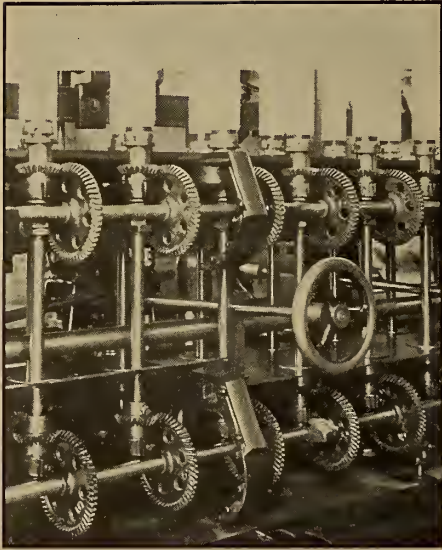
BOBBIN AND SPINDLE SHAFTS OF SPEED FRAME, SHOWING SKEW BEVELS
